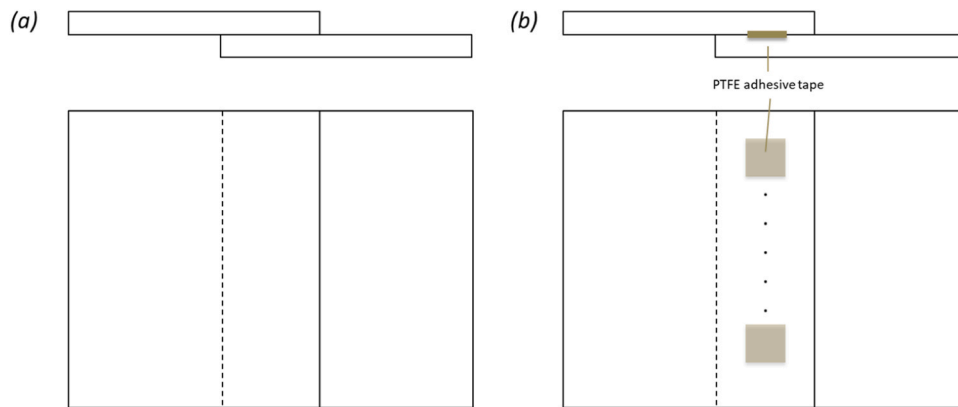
Schematic drawing of (a) pristine and (b) defective CF/PPS welded lap-joint.
